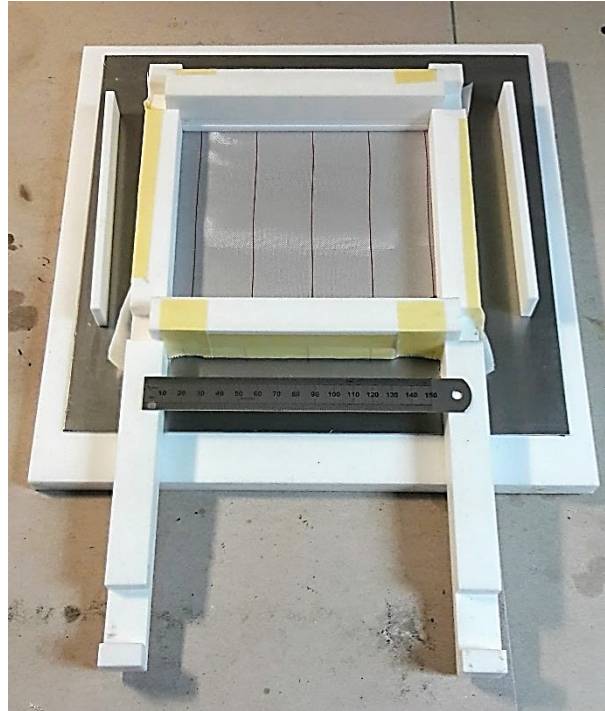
the assembled PTFE mould with the peel-ply bottom used to manufacture the foam slabs.
